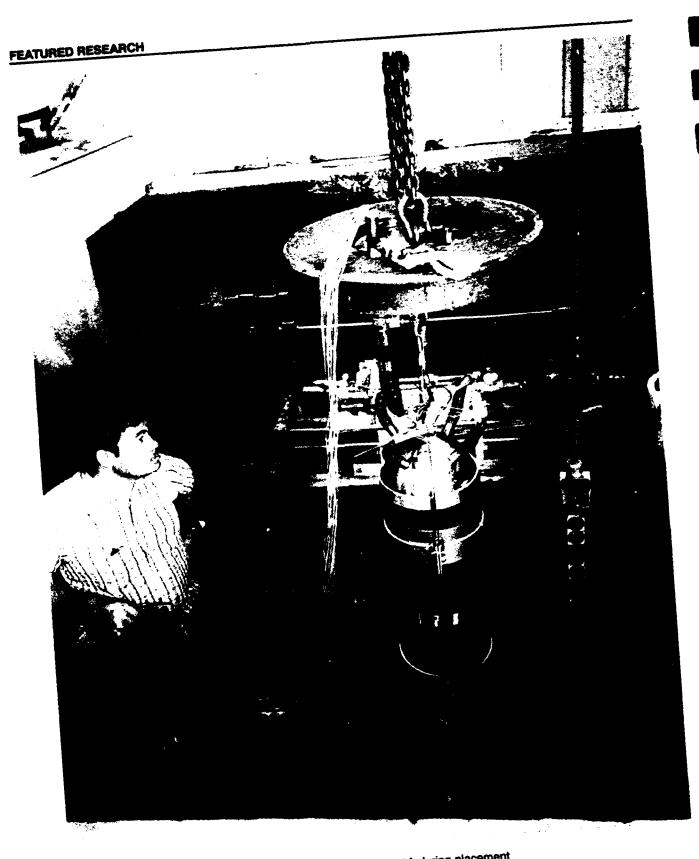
Housing assembly 1A during placement in the pressure vessel for external pressure testing.
